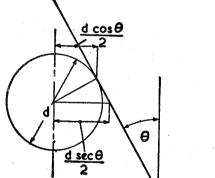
Taper Plug Gauge measured with rollers, with geometry of roller contact.
